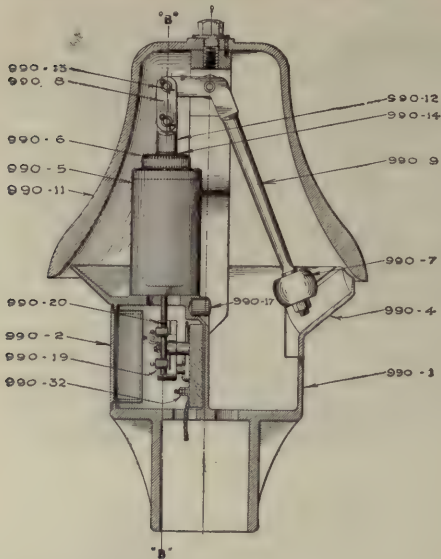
Bell for Side of Pole. Bryant Zinc Company.
